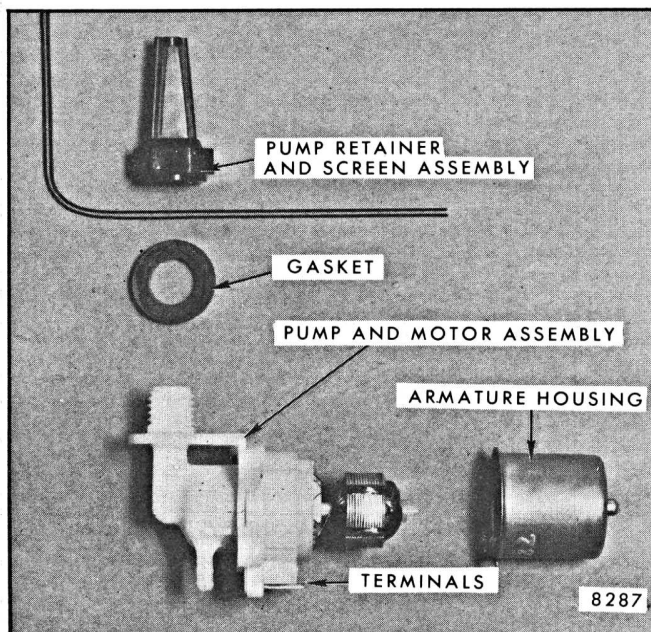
Jar Mounted Motor and Pump Assembly
